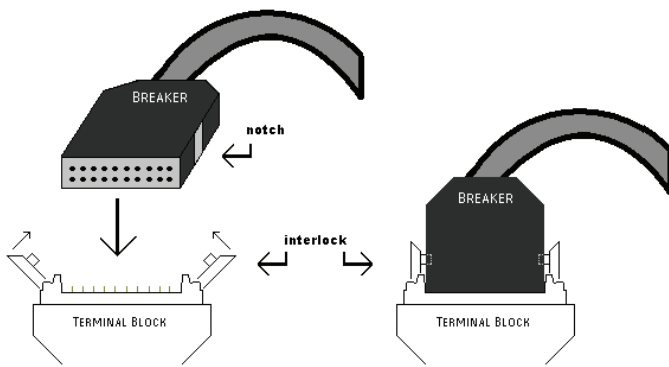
Side view of breaker cable-terminal block insertion and attachment.
